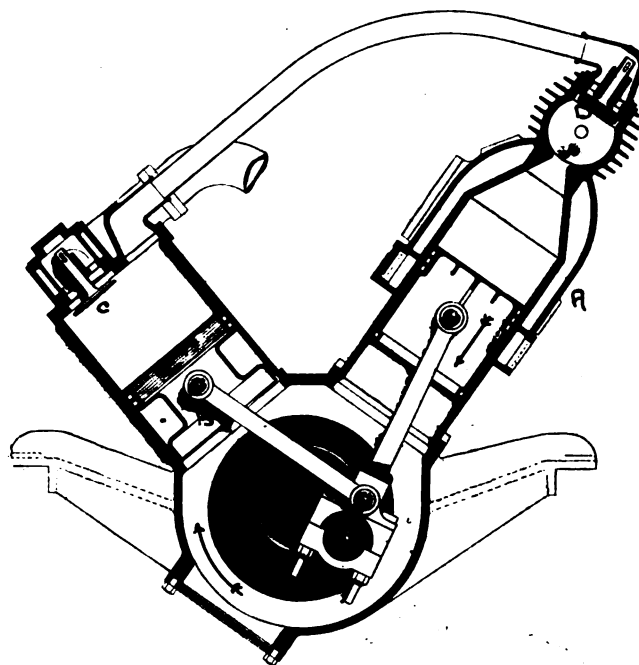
Section through Two-stroke Engine Company's New Motor.
